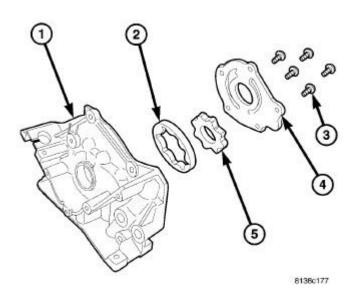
Oil Pump Assembly Courtesy of CHRYSLER LLC
